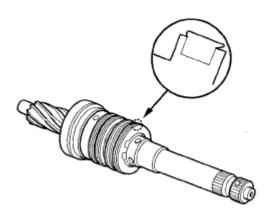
Checking Inner Wall Of Valve Housing Where Seal Ring Slides Courtesy of AMERICAN HONDA MOTOR CO., INC.
